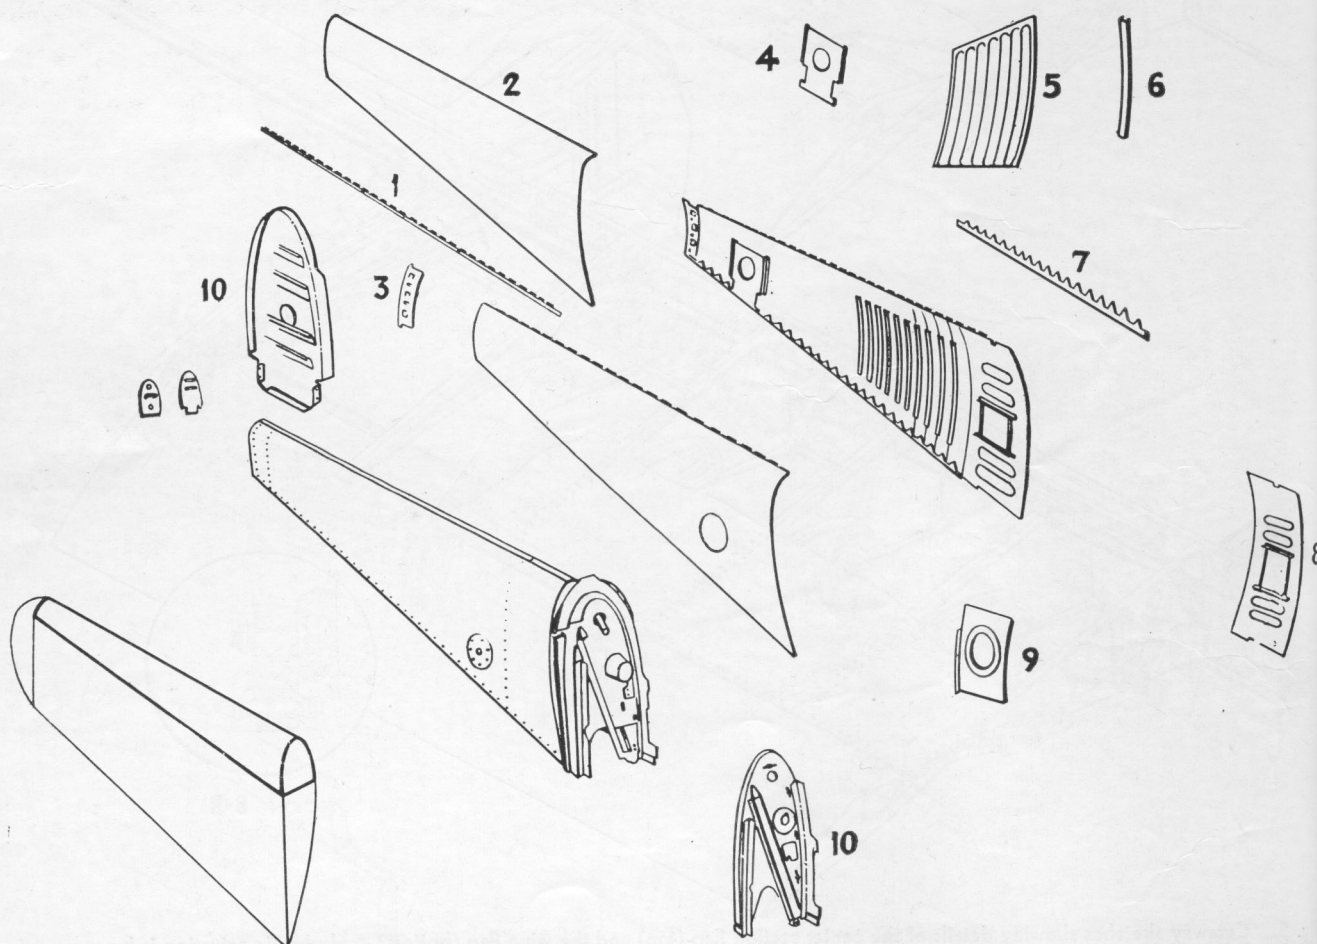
Leading-edge assembly, outer wing, showing: (1) well; (2) skin; (3) doubler; (4) filler plate; (5) corrugations; (6) capstrip; (7) finger piano-type hinge; (8) doubler; (9) sump well; (10) ribs.
